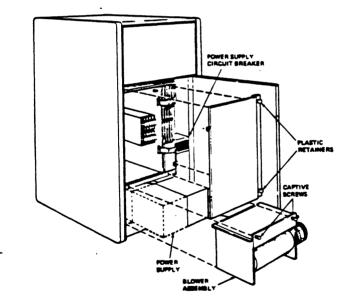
CABINET CIRCUIT BREAKER REMOVAL
